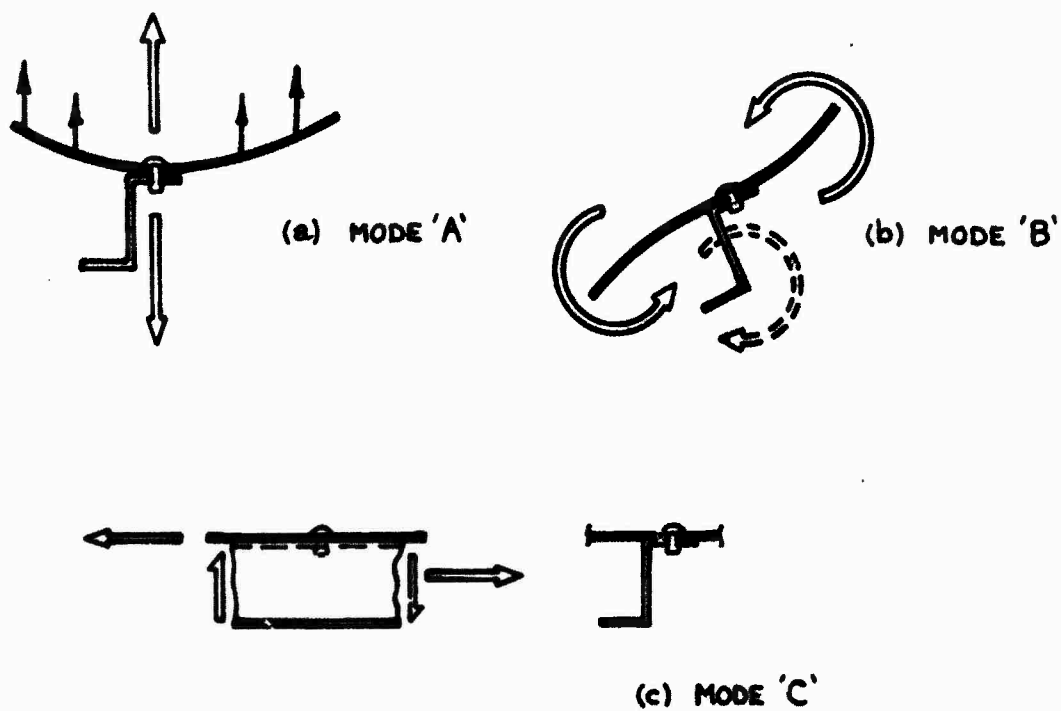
LOADING ACTIONS ON A RIVETED JOINT BETWEEN THE PLATE AND STRINGER.
